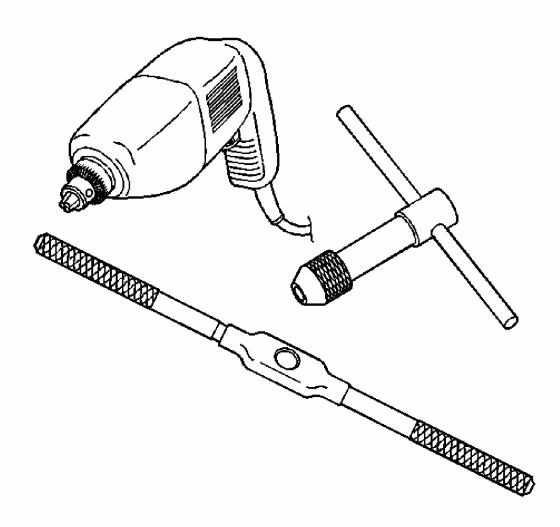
View Of J 42385-400 Tool Kit Courtesy of GENERAL MOTORS CORP.
